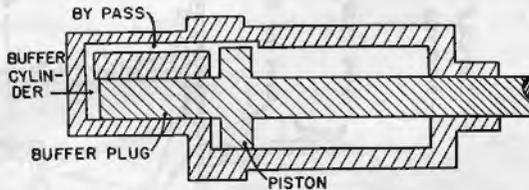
Recoil cylinder, 12-inch barbette carriage M1917.
